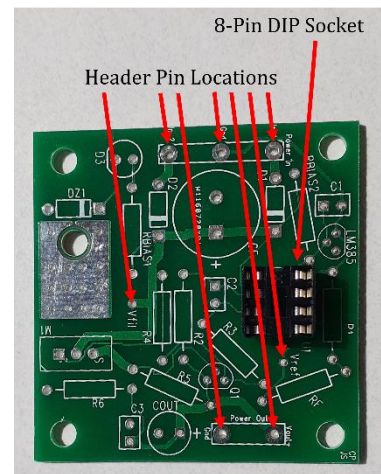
Custom PCB for DC Output Power Supply Project with DIP Socket Installed and Header Pin Locations Illustrated.
